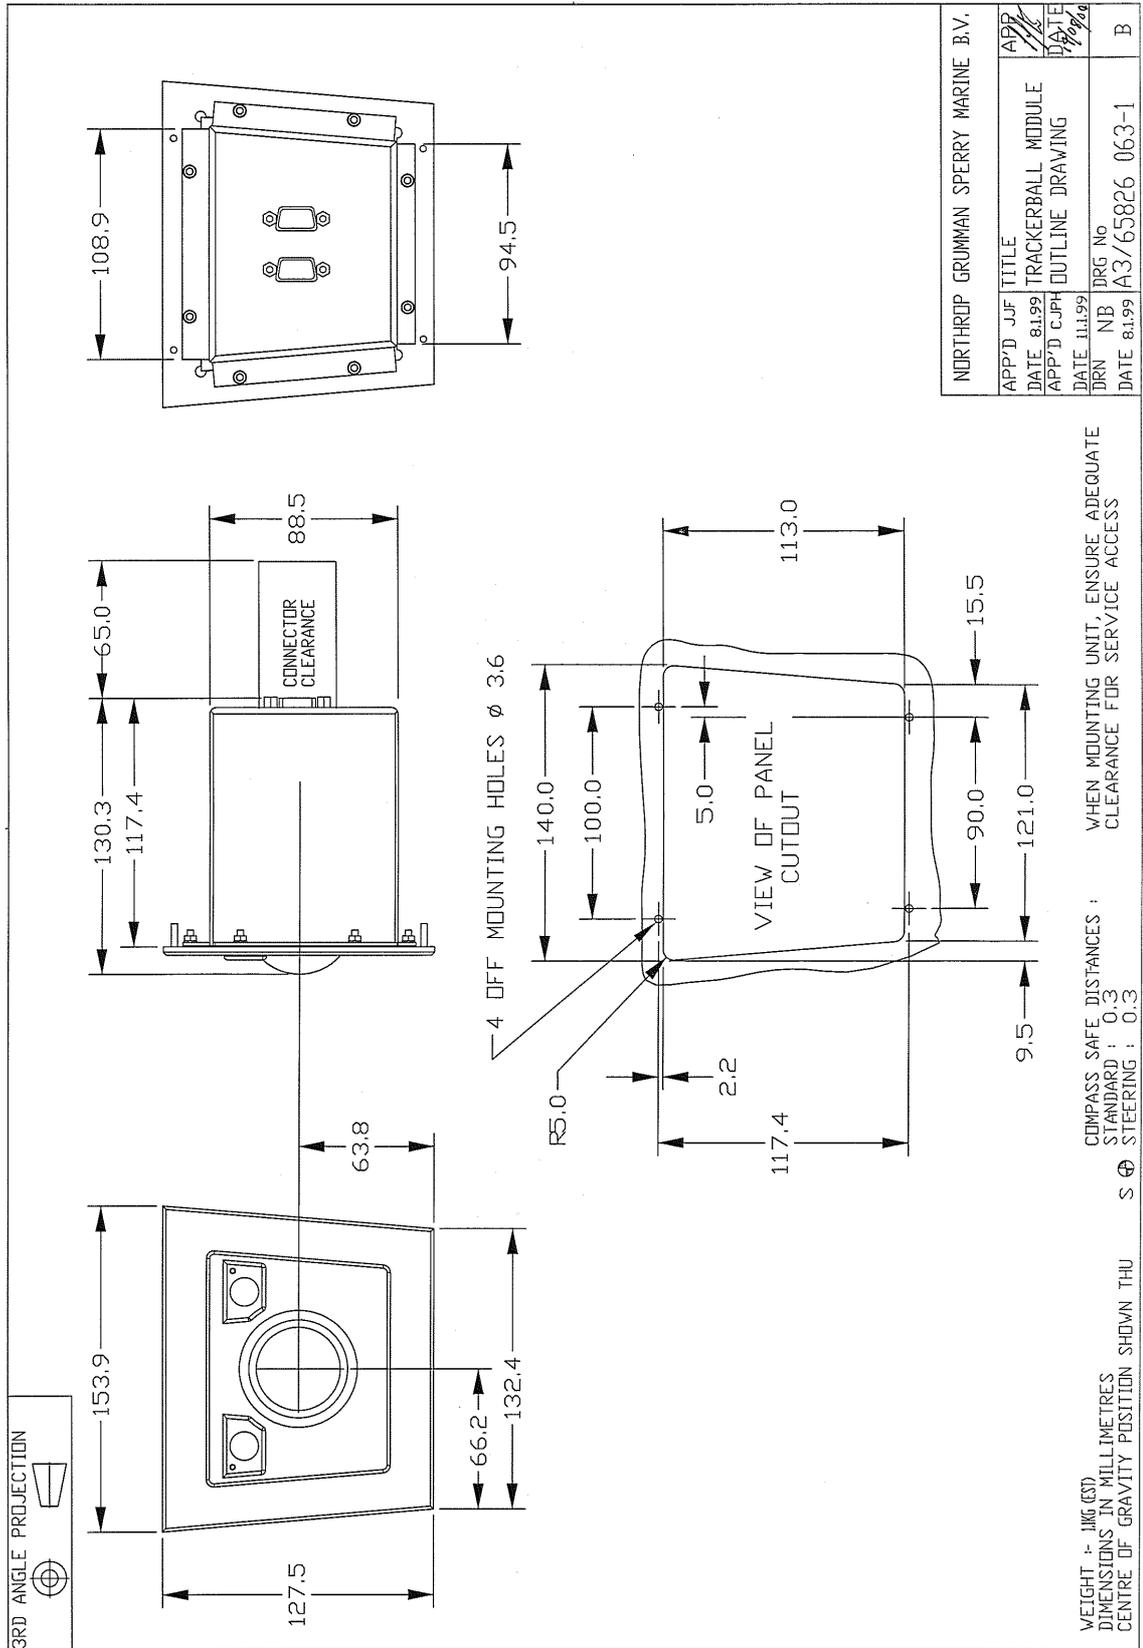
Trackerball Module Outline Drawing (154mm version)
